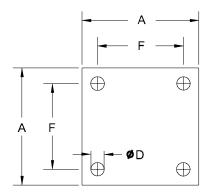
BASE AND TOP PLATE DIMENSIONS
